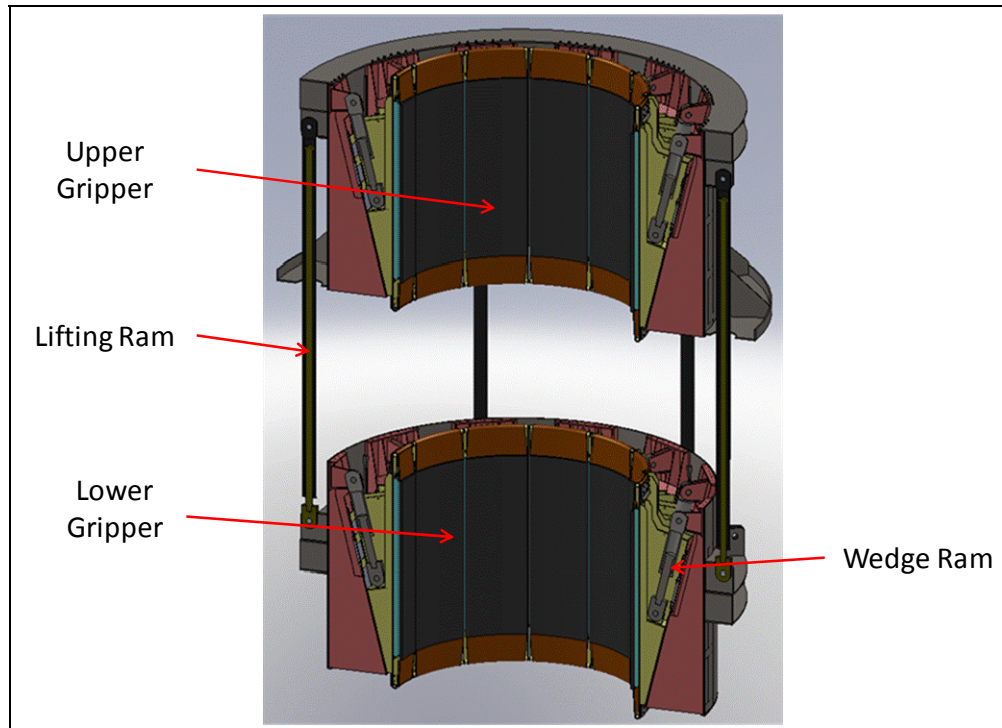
4m Upper and Lower Gripper Cross Sectional View
